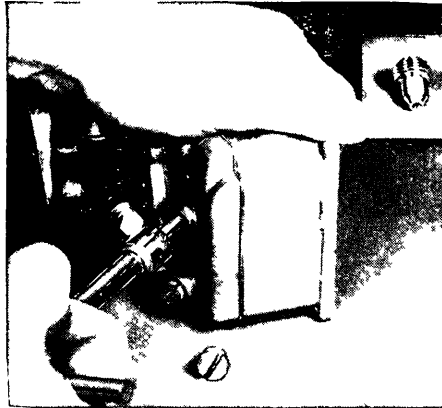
Assemble main metering jet (tool T-24924). Assemble main jet plug. The shoulder of the plug is tapered and fits into tapered seat, thereby making a gasket unnecessary
